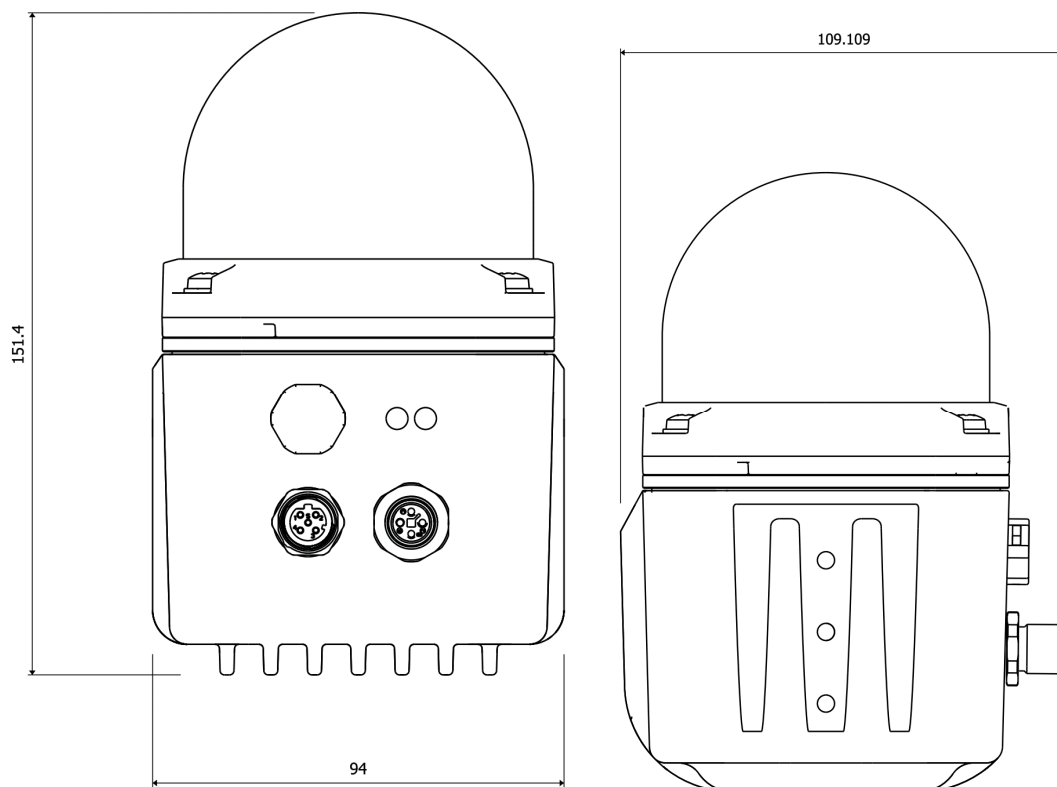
LPR[®]-1DHP-200 housing dimensions
